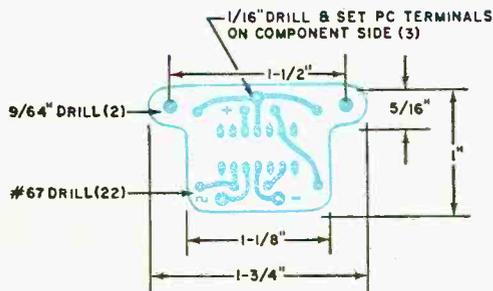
Drilling information for the PC board. Use of PC terminals makes a professional-looking job.
